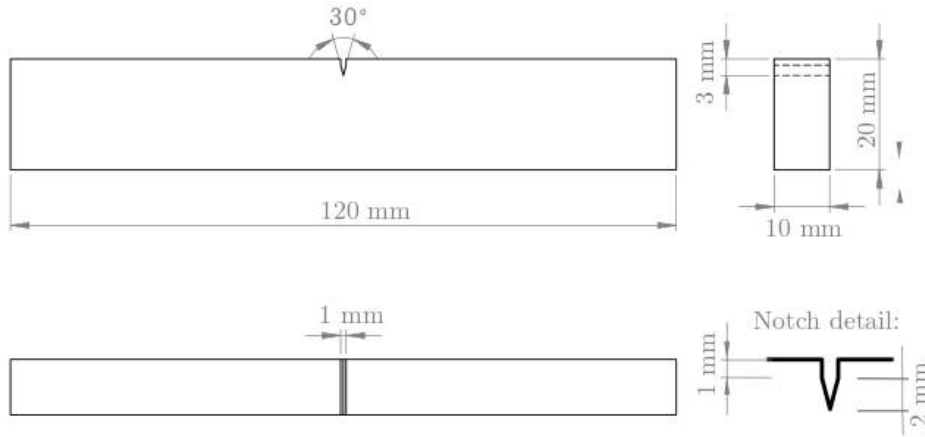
Dimensions of the fatigue crack growth samples.
